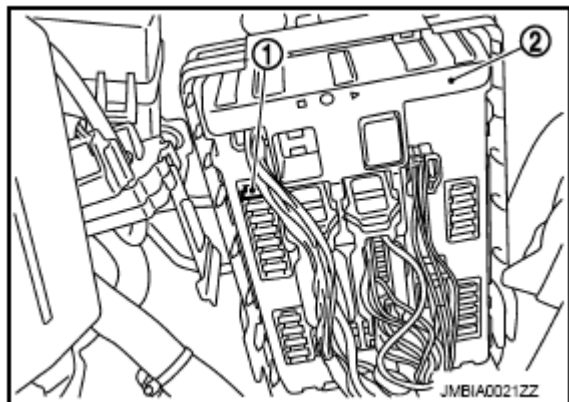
Locating Fuel Pump Fuse And IPDM E/R
